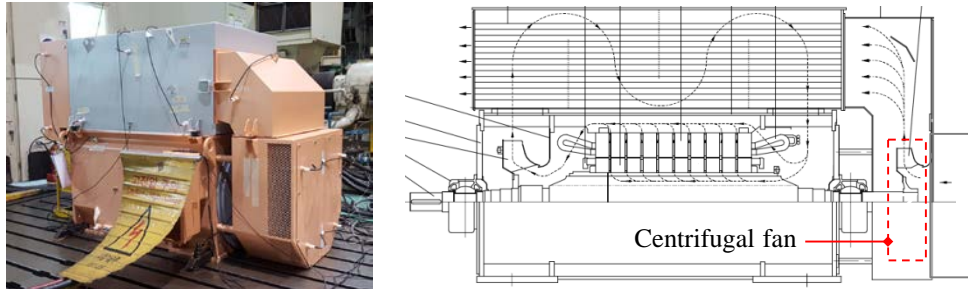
Totally enclosed air to air cooled (TEAAC) induction machine and sectional drawing.
